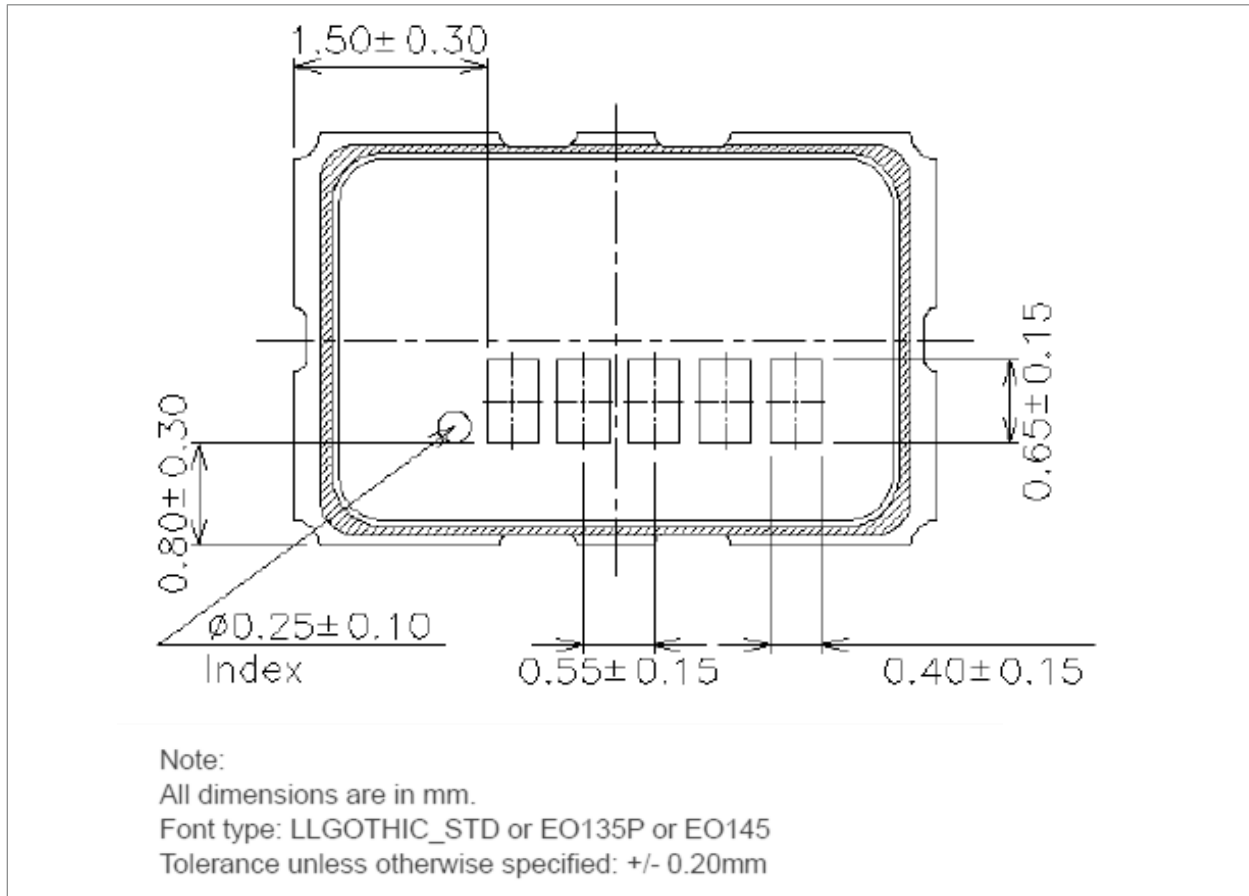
Standard Marking Dimensions for Ceramic Package (5.0 mm x 3.2 mm)
